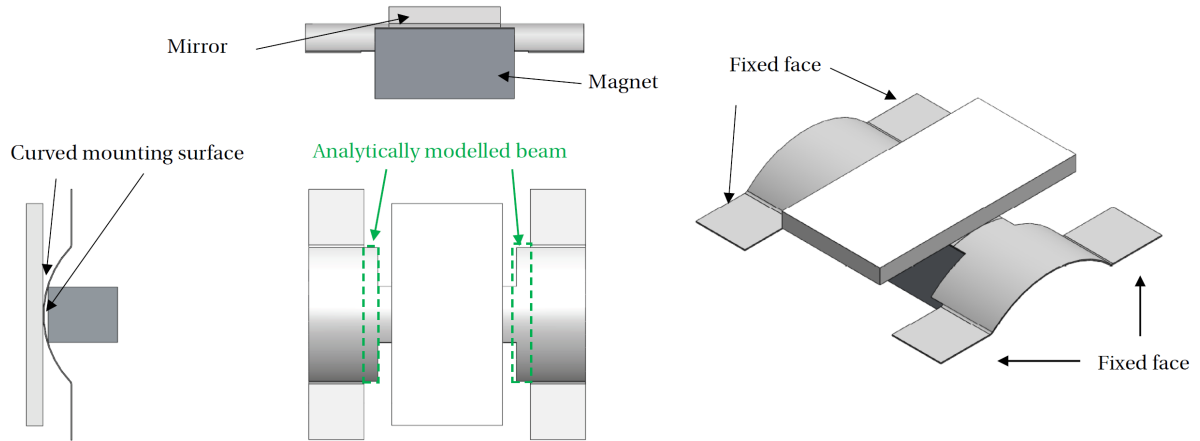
CAD model of the LF flexure with the U shape torsion beam
